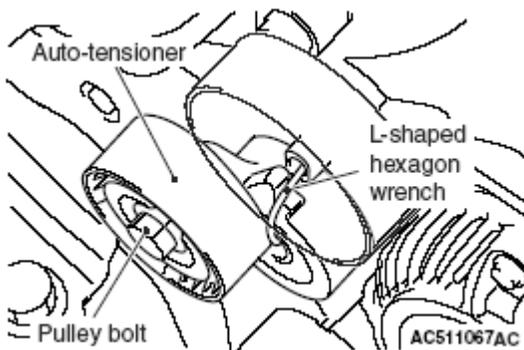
Identifying Pulley Bolt And Auto-Tensioner
